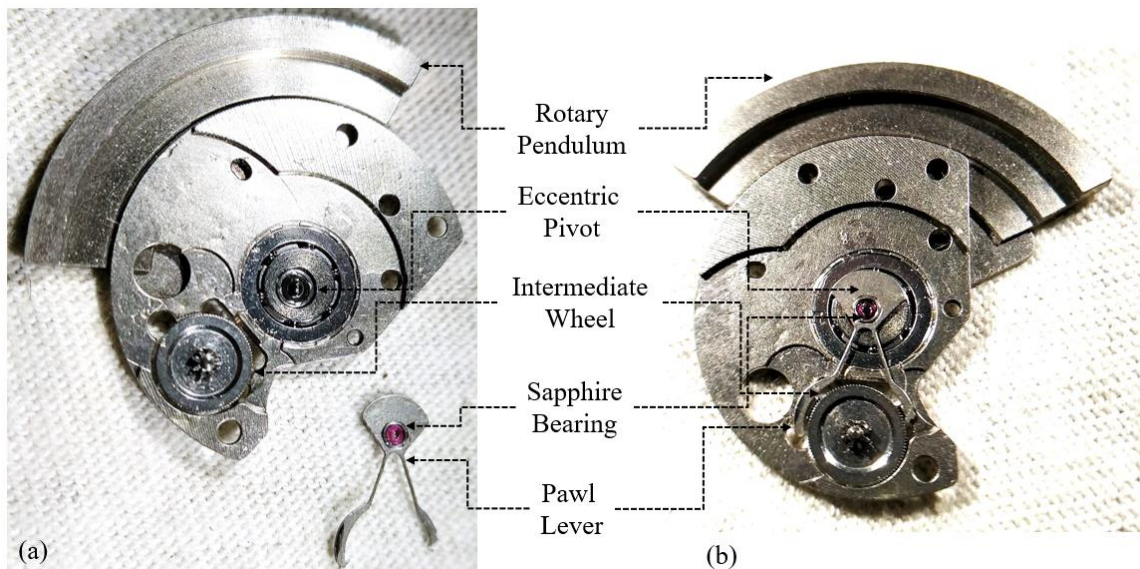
The ETA Autowinder mechanism: (a) Disassembled, and (b) Assembled
